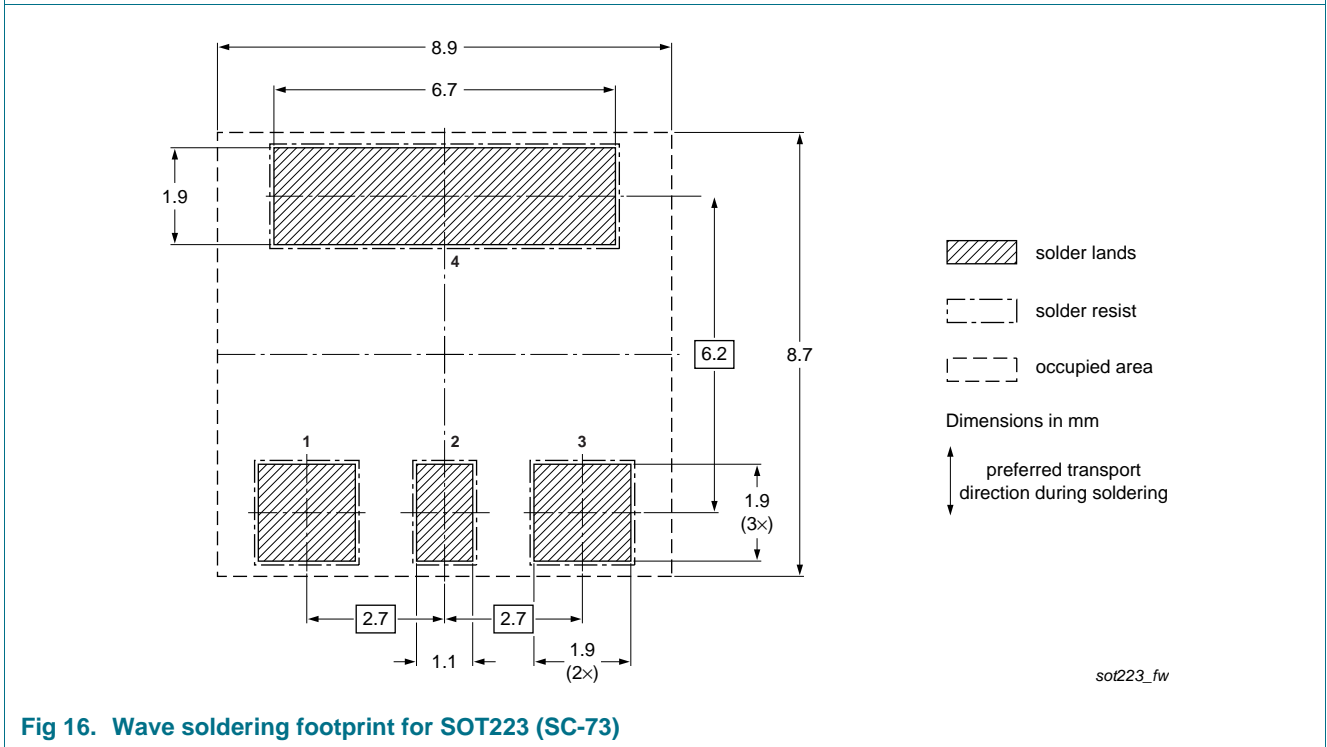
Wave soldering footprint for SOT223 (SC-73)
